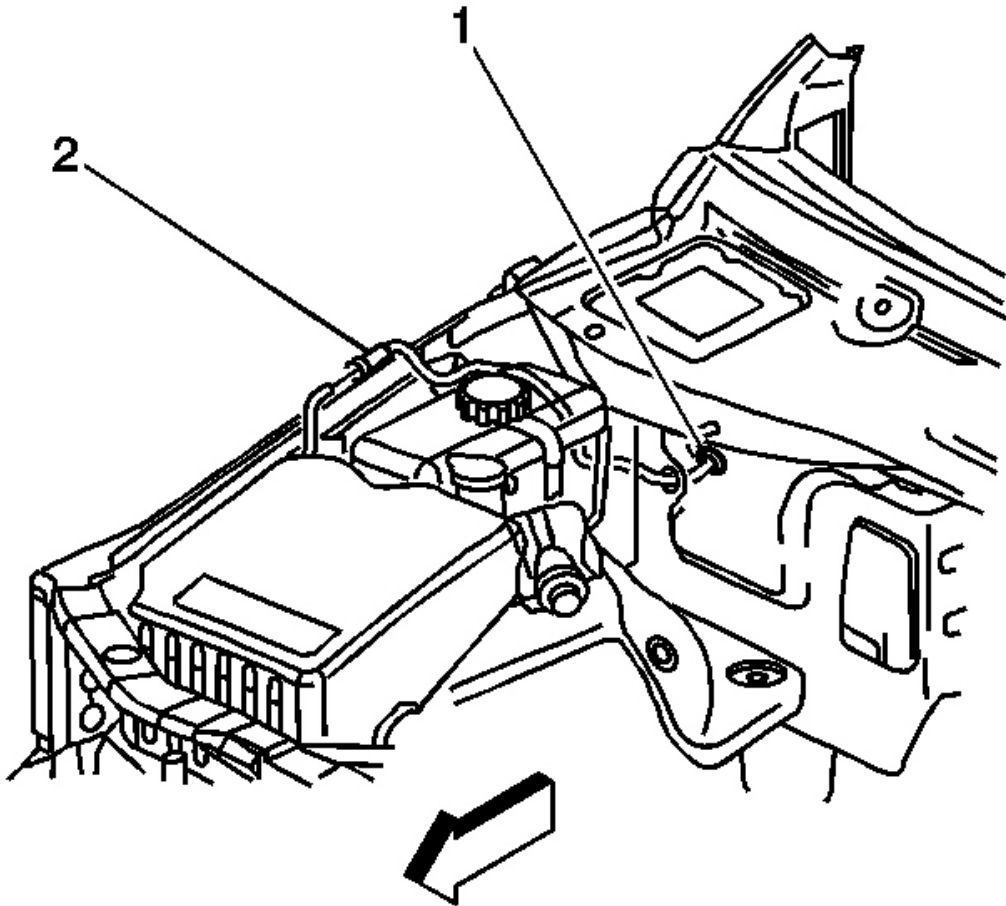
Locating Rear Washer Hose Connection, Near Coolant Tank (TrailBlazer, Envoy)
